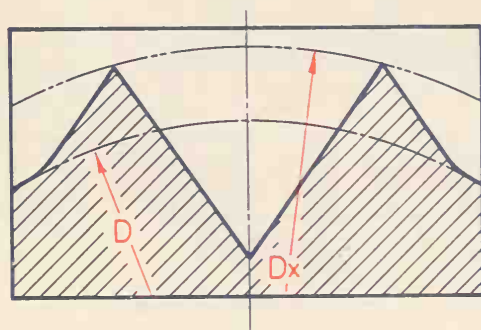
Enlarged sectional view of one of the grooves before inserting fastener
